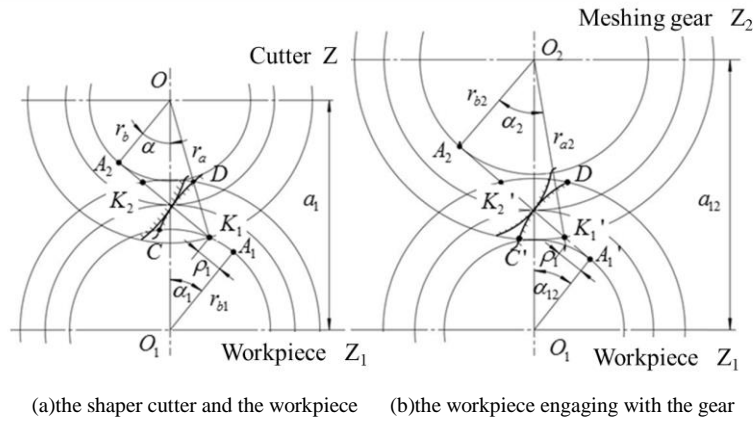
Checking Of The Transition Curve Interference When Machining The Workpiece
